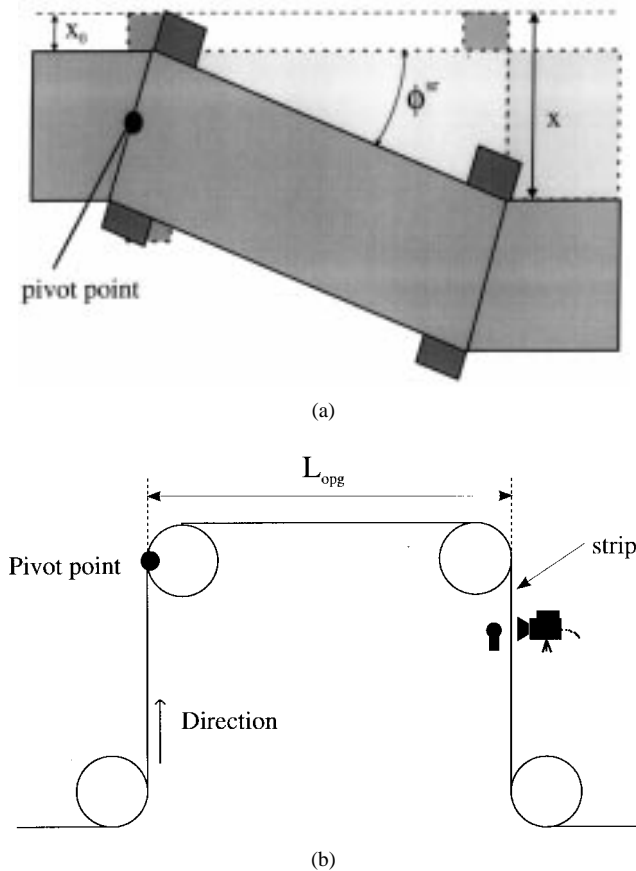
The offset pivot guide steering roll. (a) Top view. (b) Side view.
